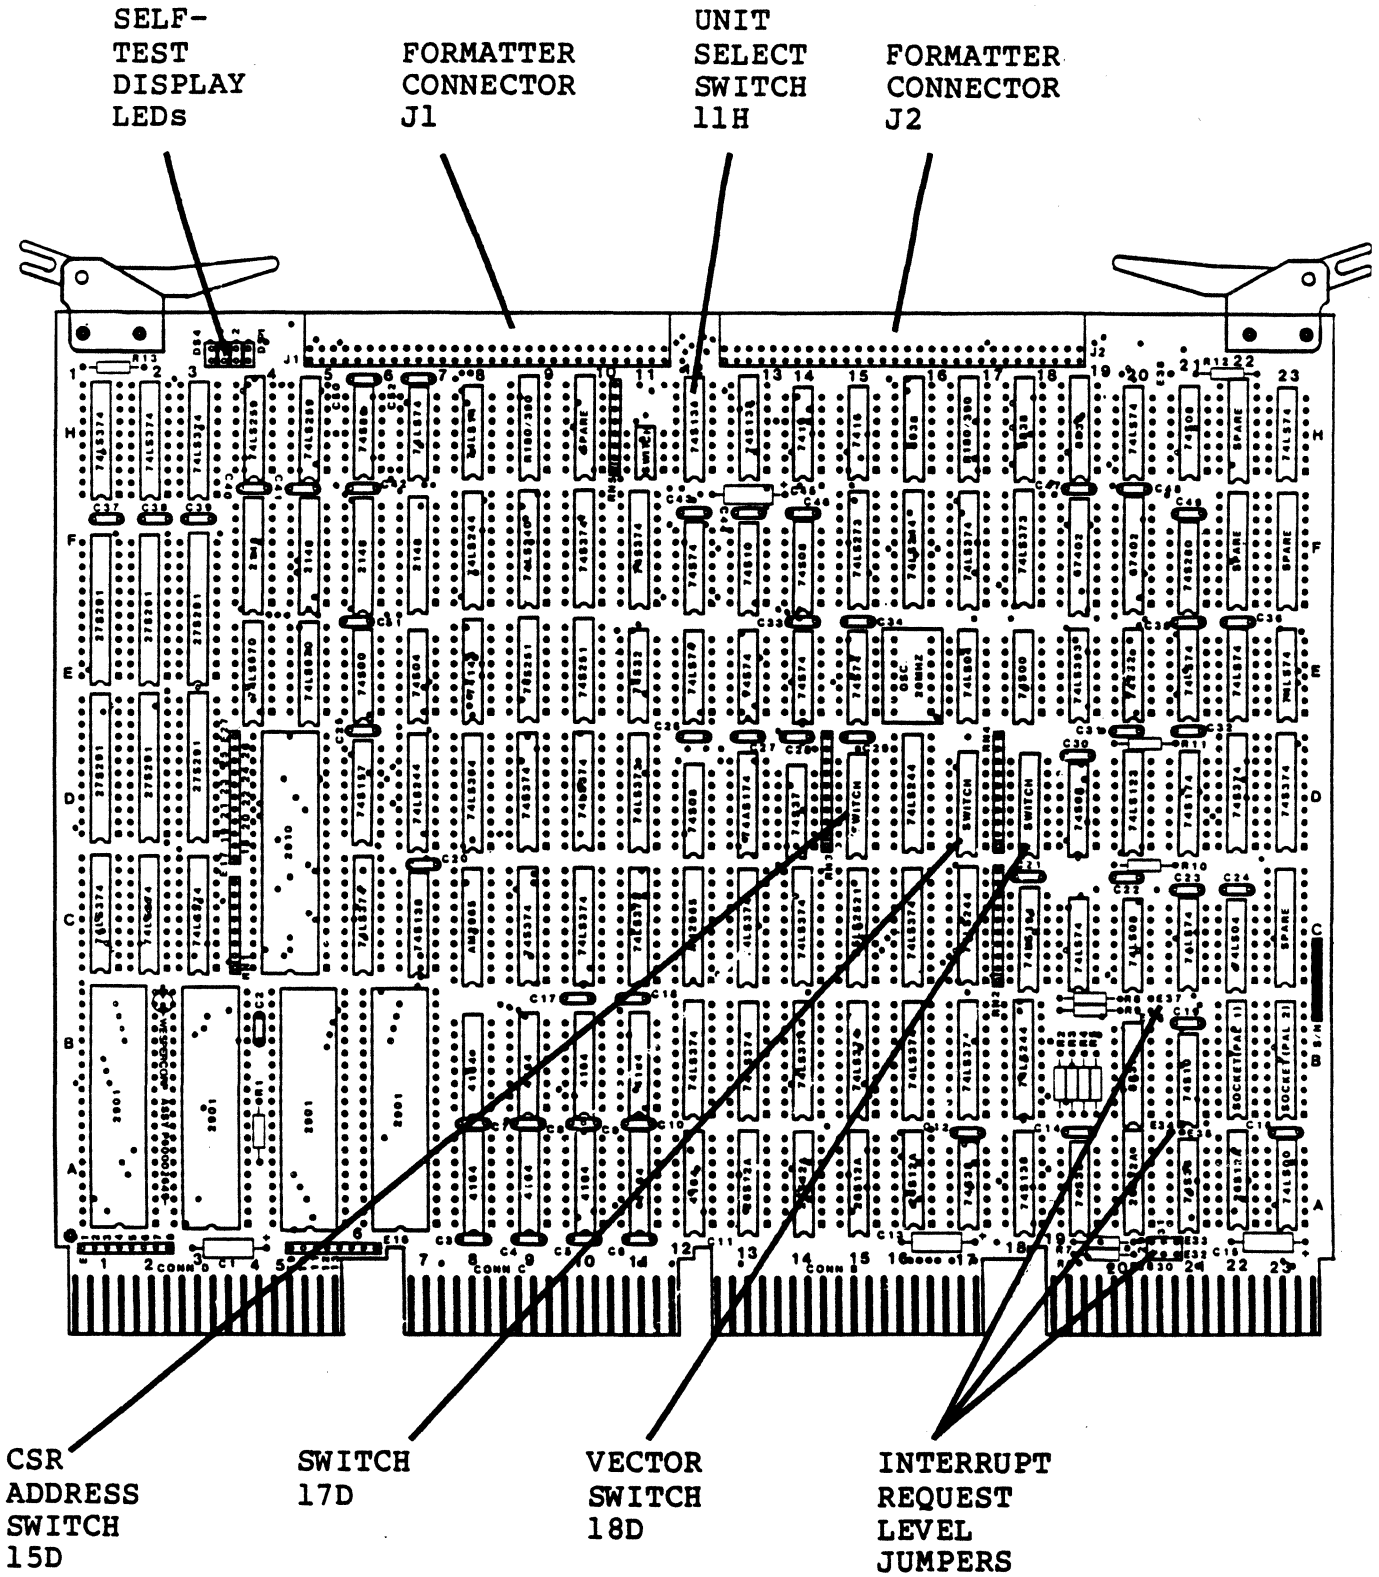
Tape Dimension / Q-Bus Board Illustration
